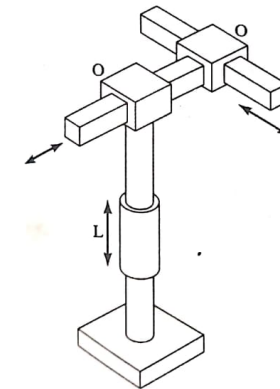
Cartesian coordinate body-and-arm assembly.
